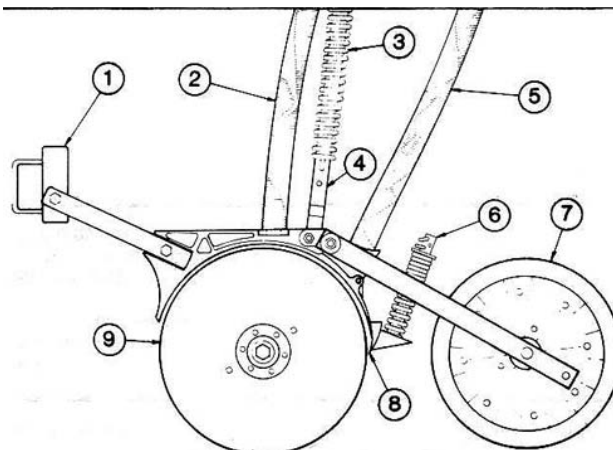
Double Disk Opener: (1) Drill Frame, (2) Seed Hose, (3) Pressure Spring, (4) Pressure Rod, (5) Fertilizer Tube, (6) Depth Rod, (7) Gauge-Press Wheel, (8) Mud Scraper, (9) Seed Disks.
